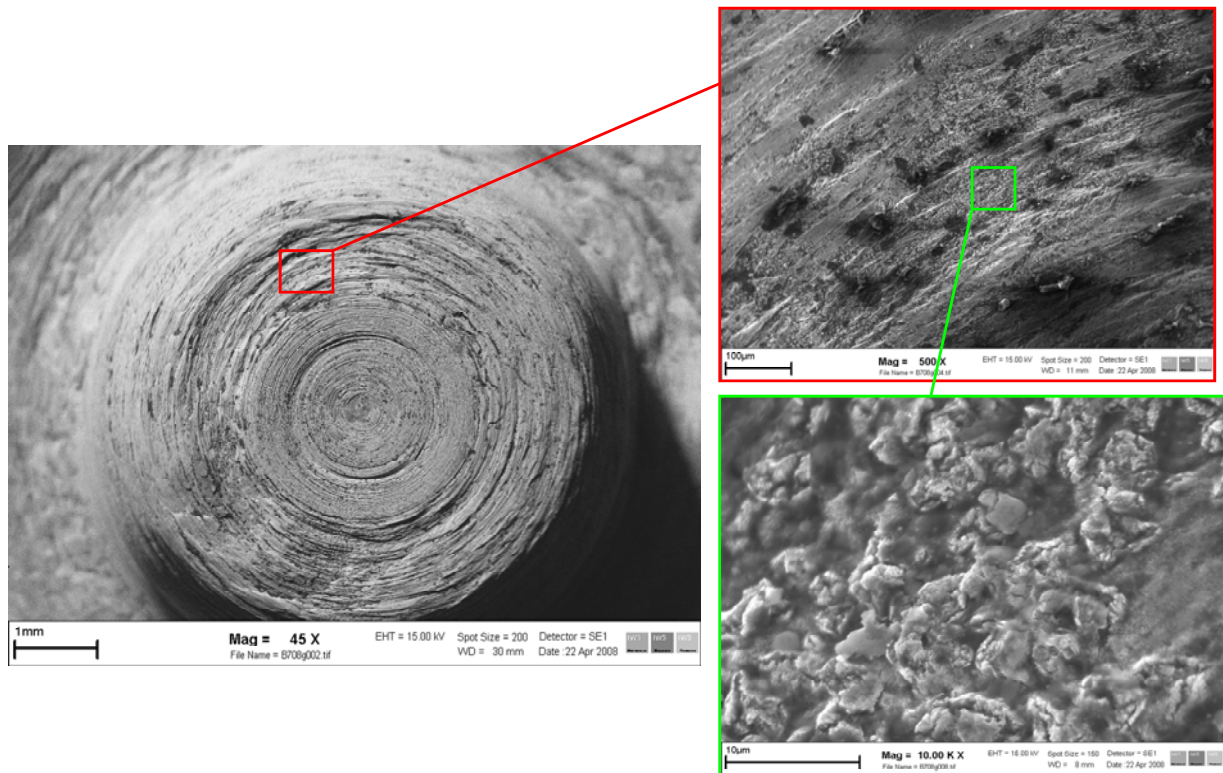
Analysis of the worn WC-Co tool surface using scanning electron microscopy
